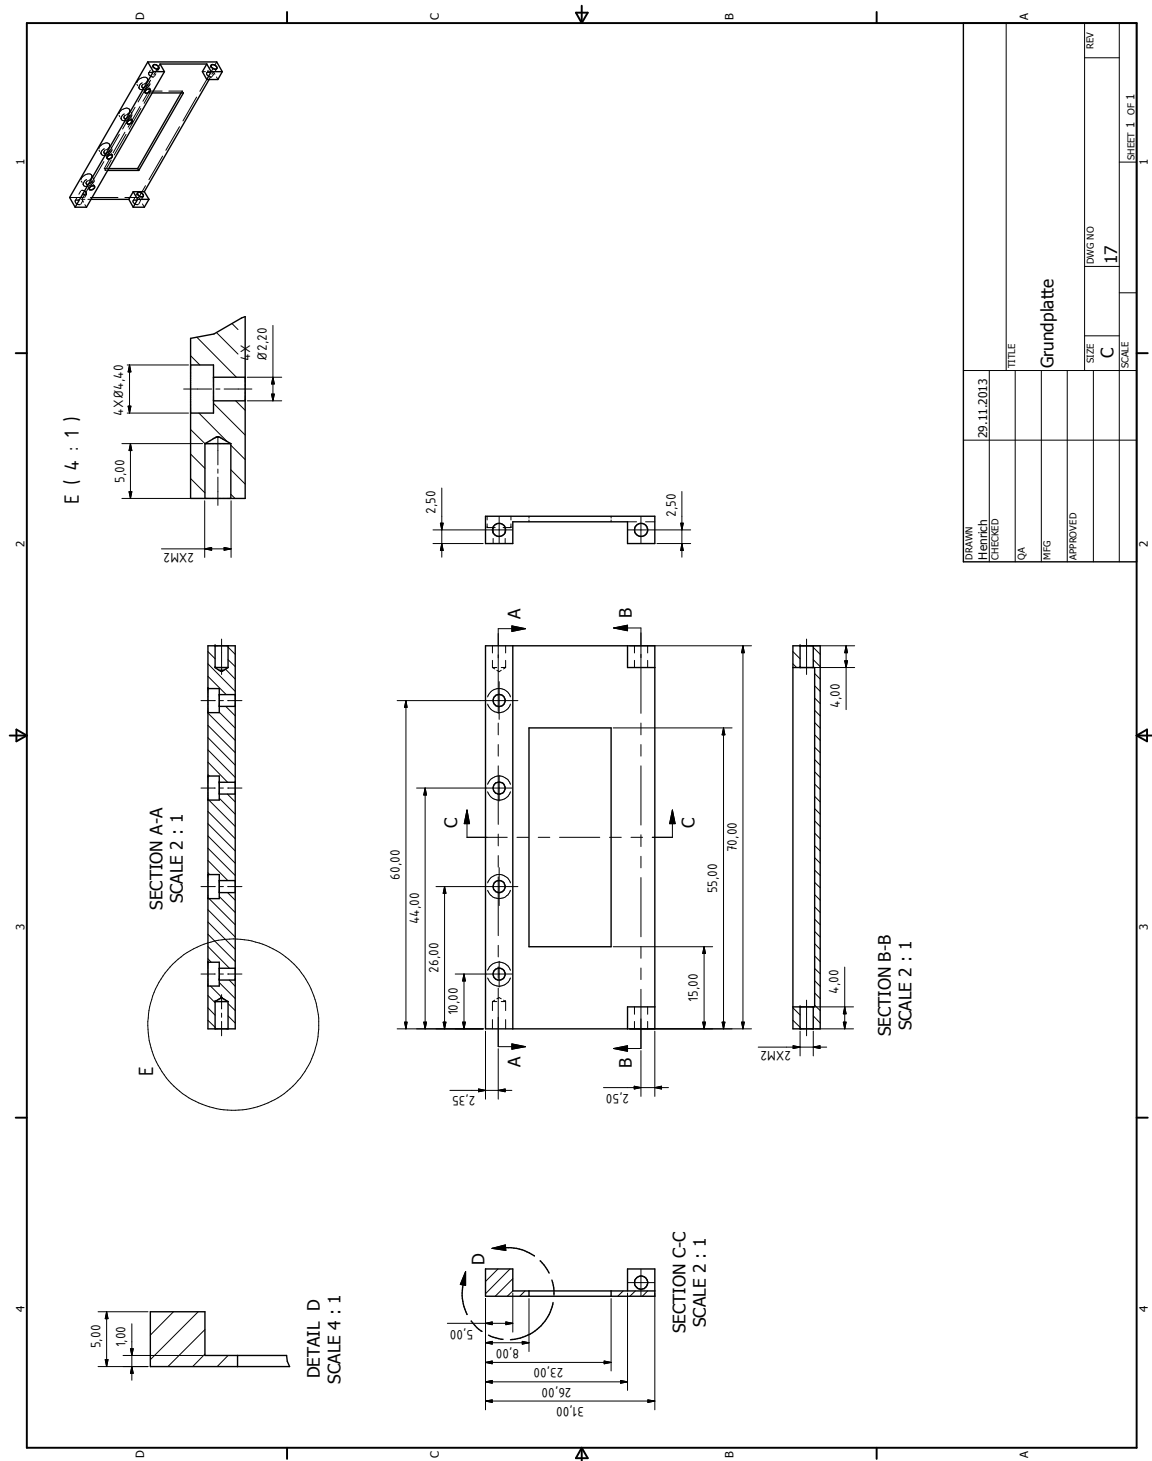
Technical drawing of the left bottom plate of the glass slide extension.
